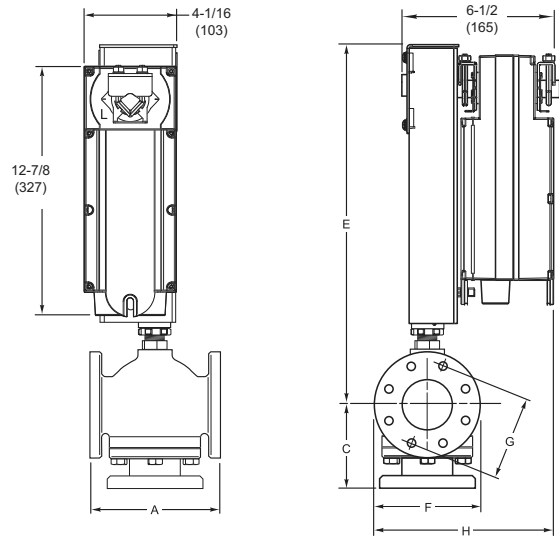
Mx41-634x with 6" Flanged 3-Way Globe Valves.
